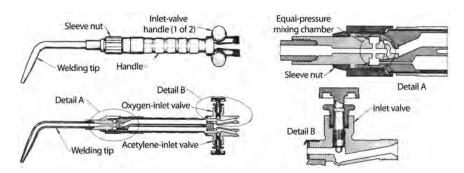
Oxyfuel gas welding torch. Source: Ref 4.1
